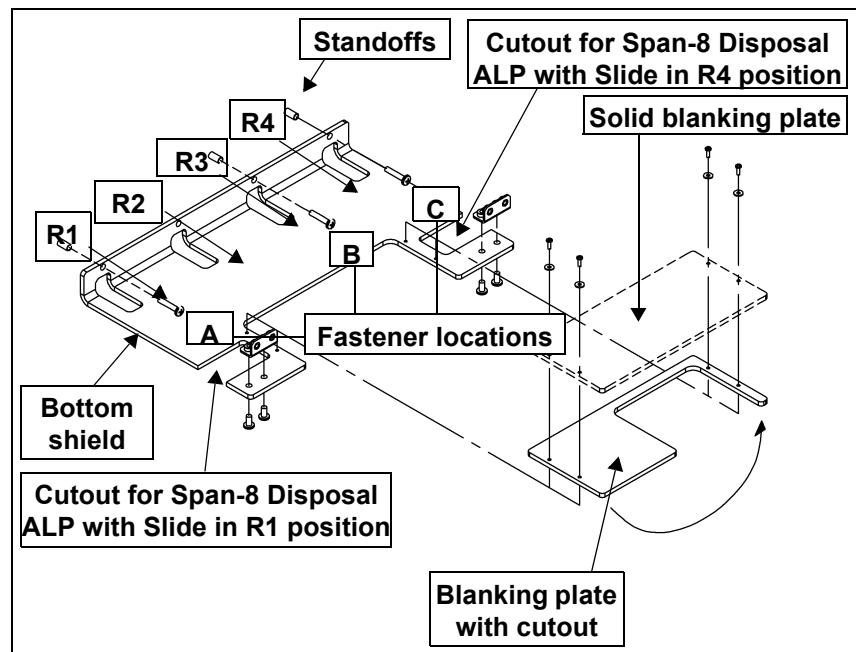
Right side bottom shield with solid and cutout blanking plates
